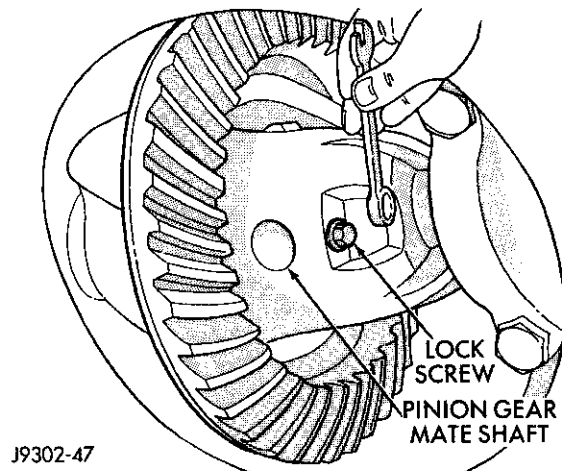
Pinion Gear Mate Shaft Lock Screw
